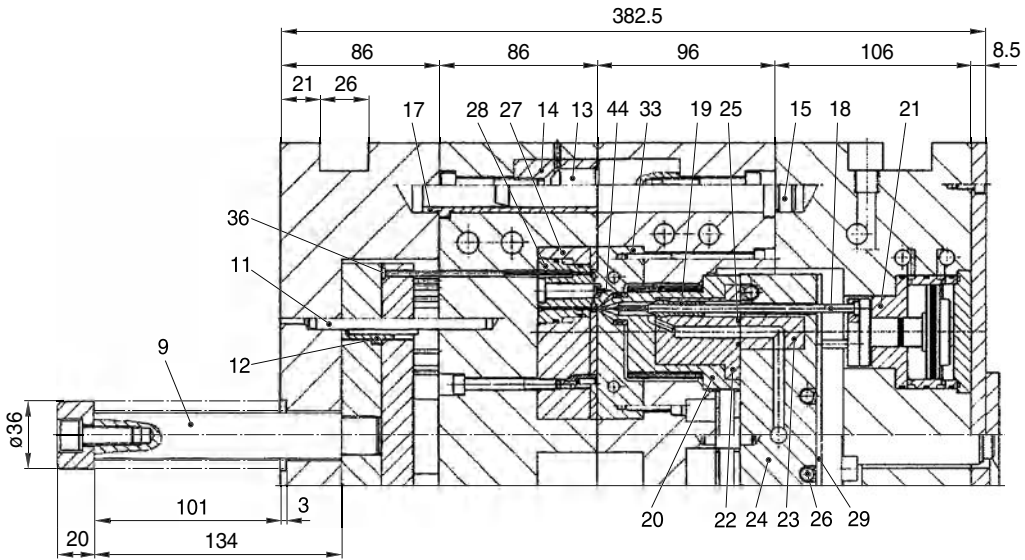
24-Cavity hot-runner injection mold for polyacetal spools
